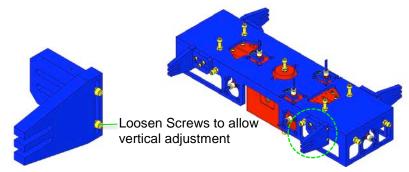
Lowering Coil Holder to eliminate slack in Wires
